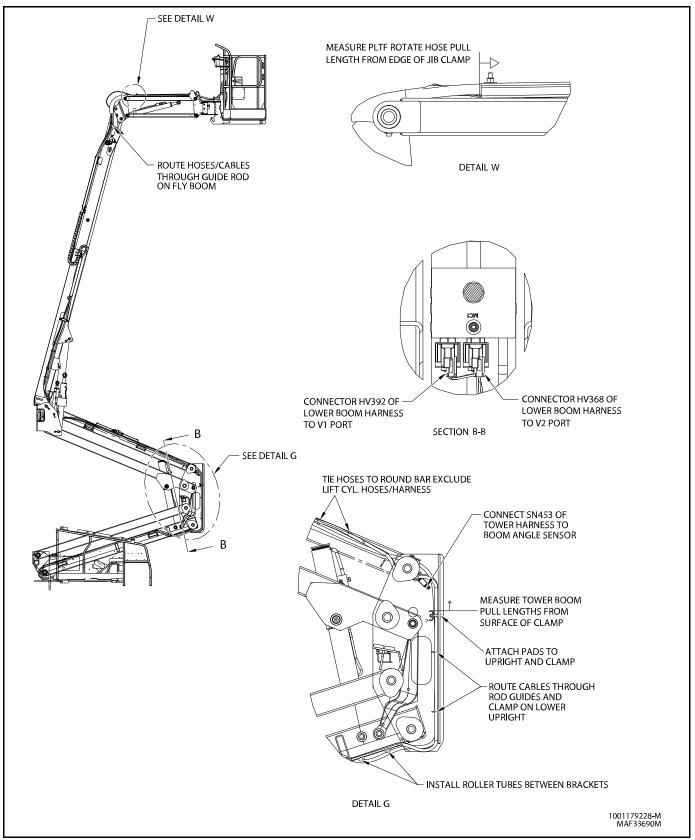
Cables and Clamps Installation - Sheet 2 of 8
